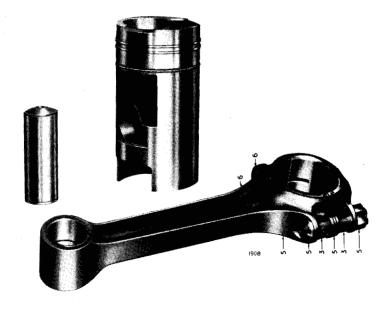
CONNECTING ROD AND PISTON ASSEMBLY
